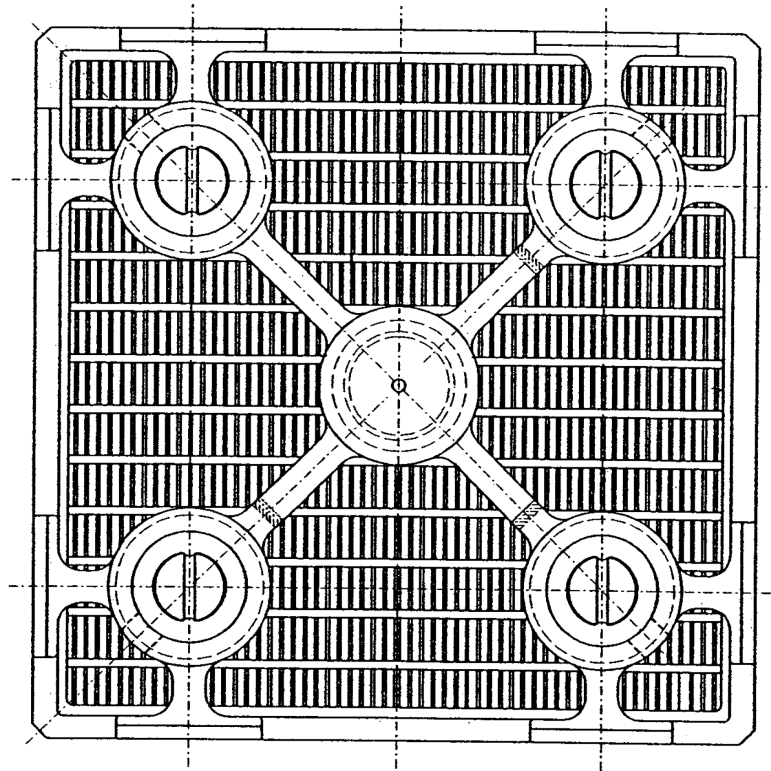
B FUEL ROD ASSEMBLY (BATCH “EE” AND LATER)
